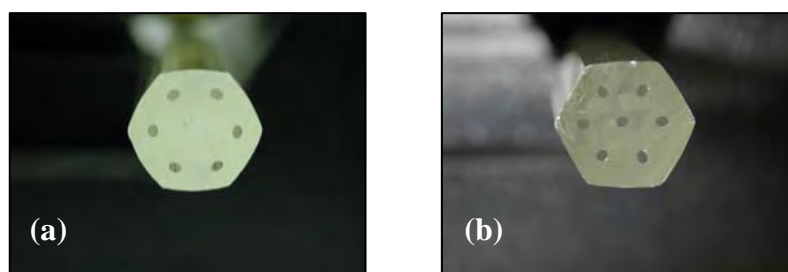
extruded SF57 glass structured preforms (a) 6-hole preform, with hole size of $\sim 1.0\text{mm}$, hole spacing of $\sim 3\text{mm}$ and diameter across the flat of $\sim 9.2\text{mm}$, (b) 7-hole preform, with hole size of $\sim 1\text{mm}$, hole spacing of $\sim 2.2\text{mm}$ and diameter across the flat of $\sim 9.0\text{mm}$
